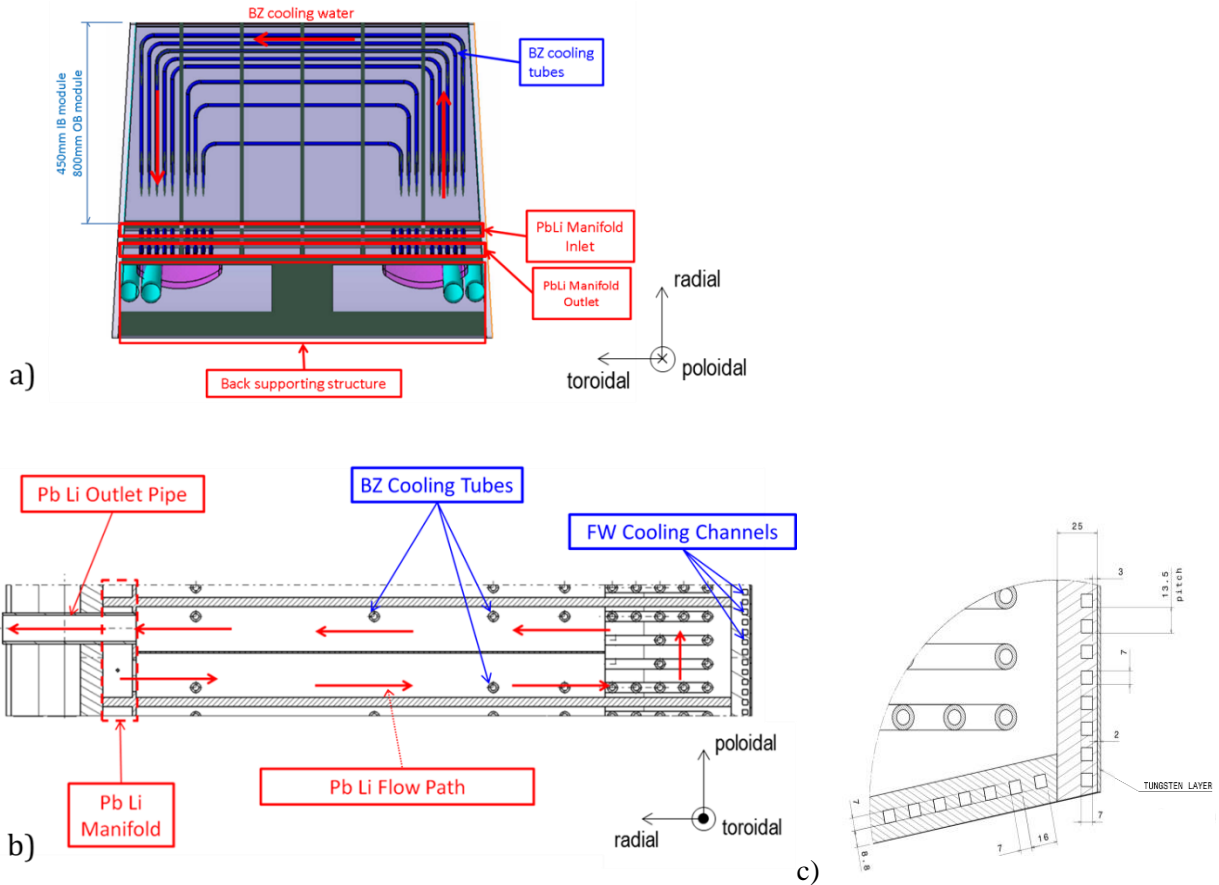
Radial-toroidal (a) and radial-poloidal (b) views of a WCLL elementary unit. (c) Detail of the cross section of the FW, showing the bottom edge of the OB segment, with the square cooling channels (reproduced from [3]).
